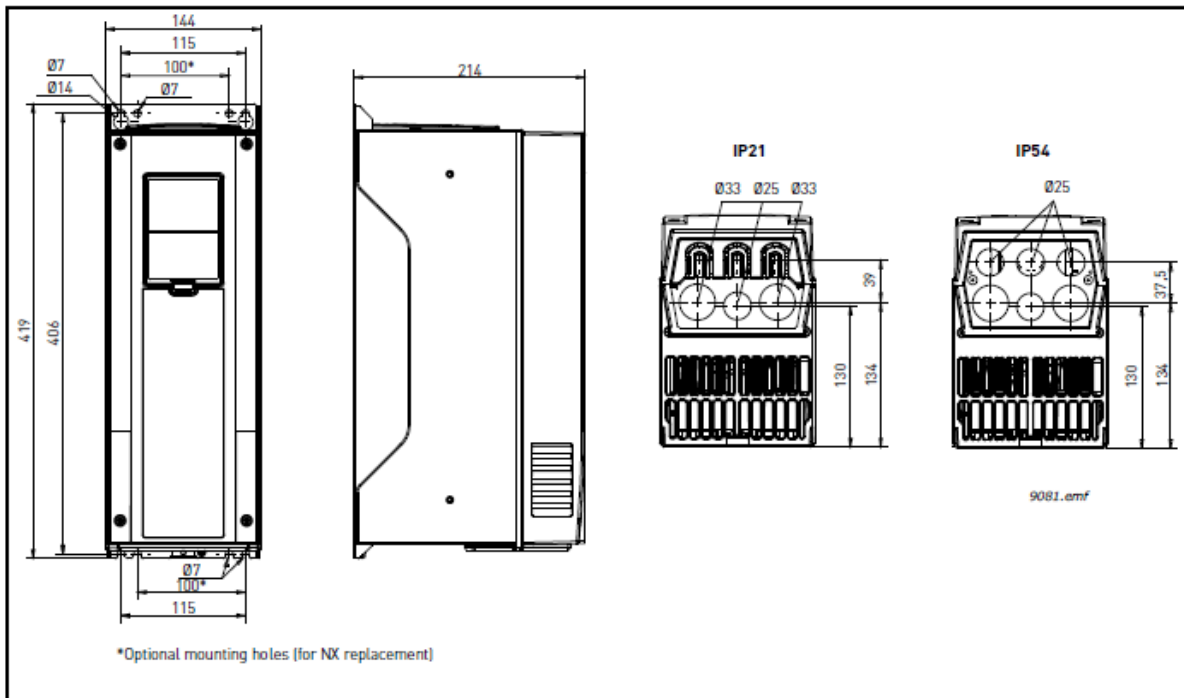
Vacon AC drive dimensions, MR5, wall mount
